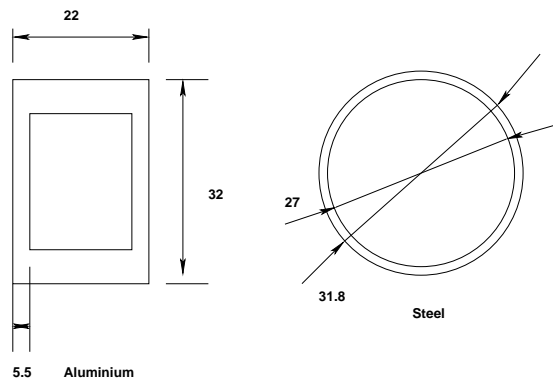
Cross-sections of Aluminum box section and steel pipe.
